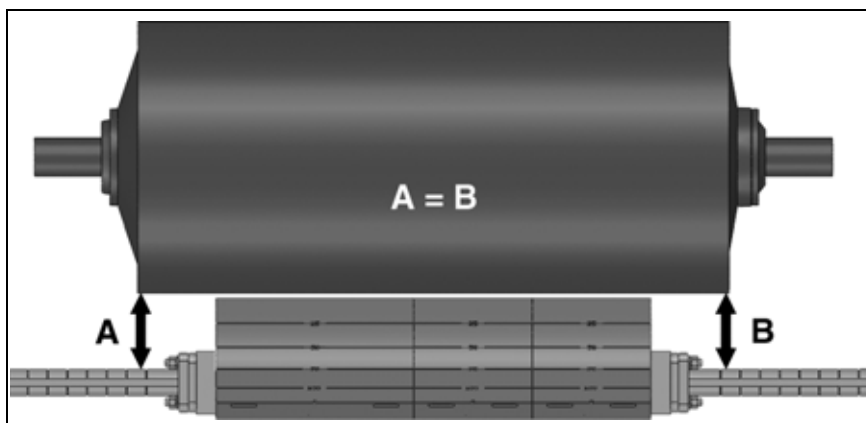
Adjust the cleaner shaft parallel to the head drum (exemplary)
